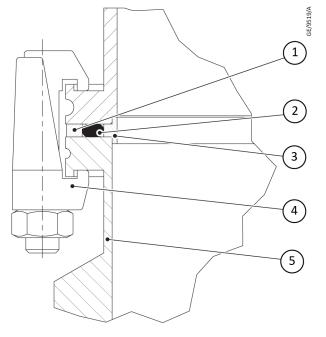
Mounting high vacuum flange ISO-K flange at ISO-K flange
